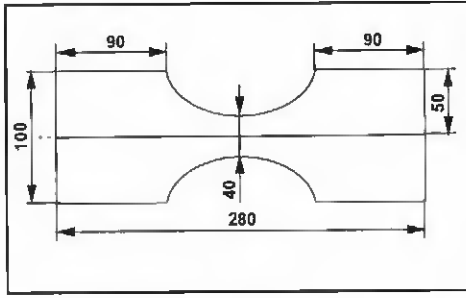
Geometry of the dumbbell-shaped workpiece.
